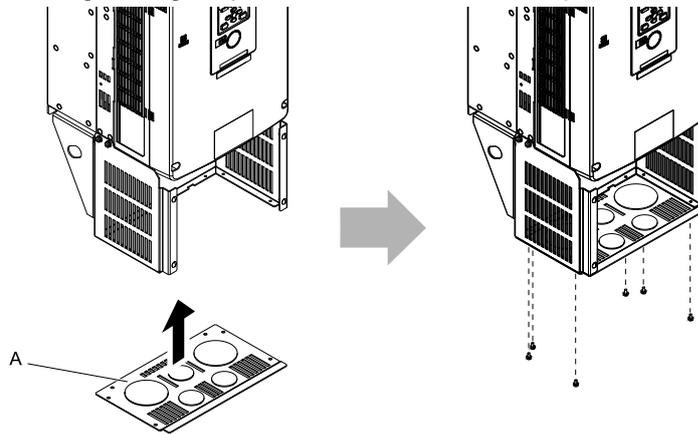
shows the locations of the screw holes on the bottom of the drive.
